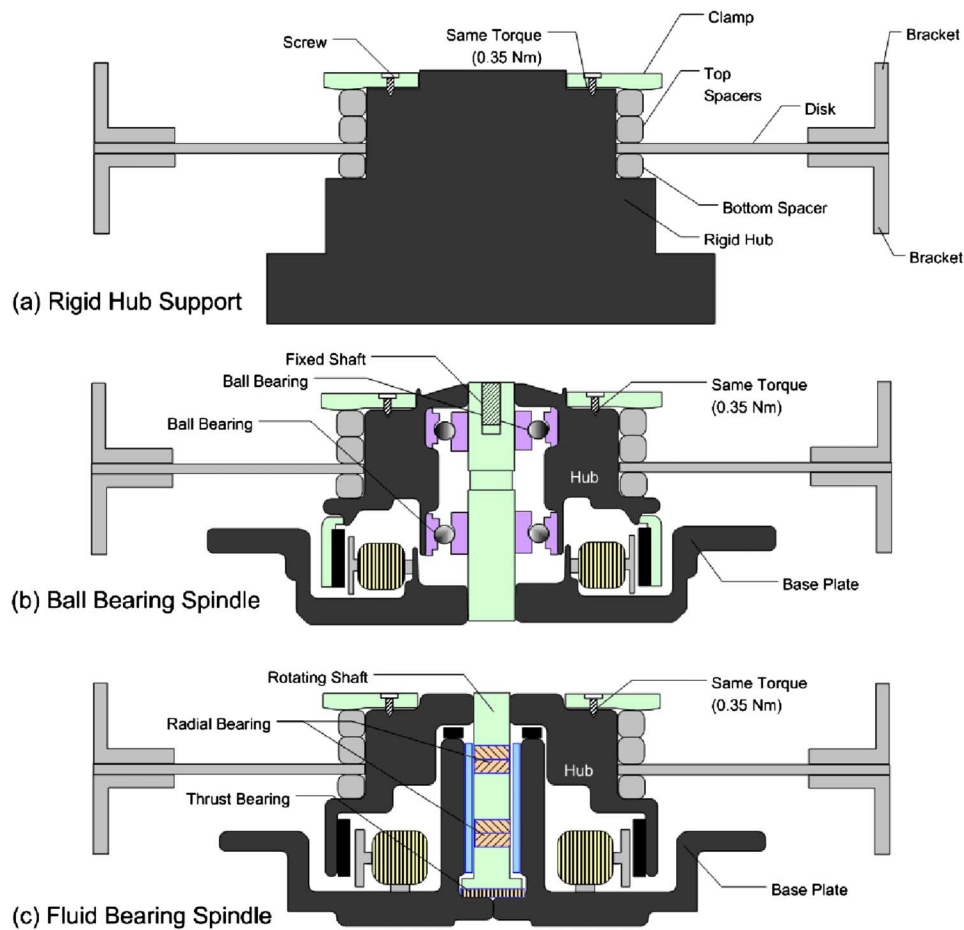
Cross sections of rigid hub, ball-bearing motor, and fluid-dynamic bearing motor
